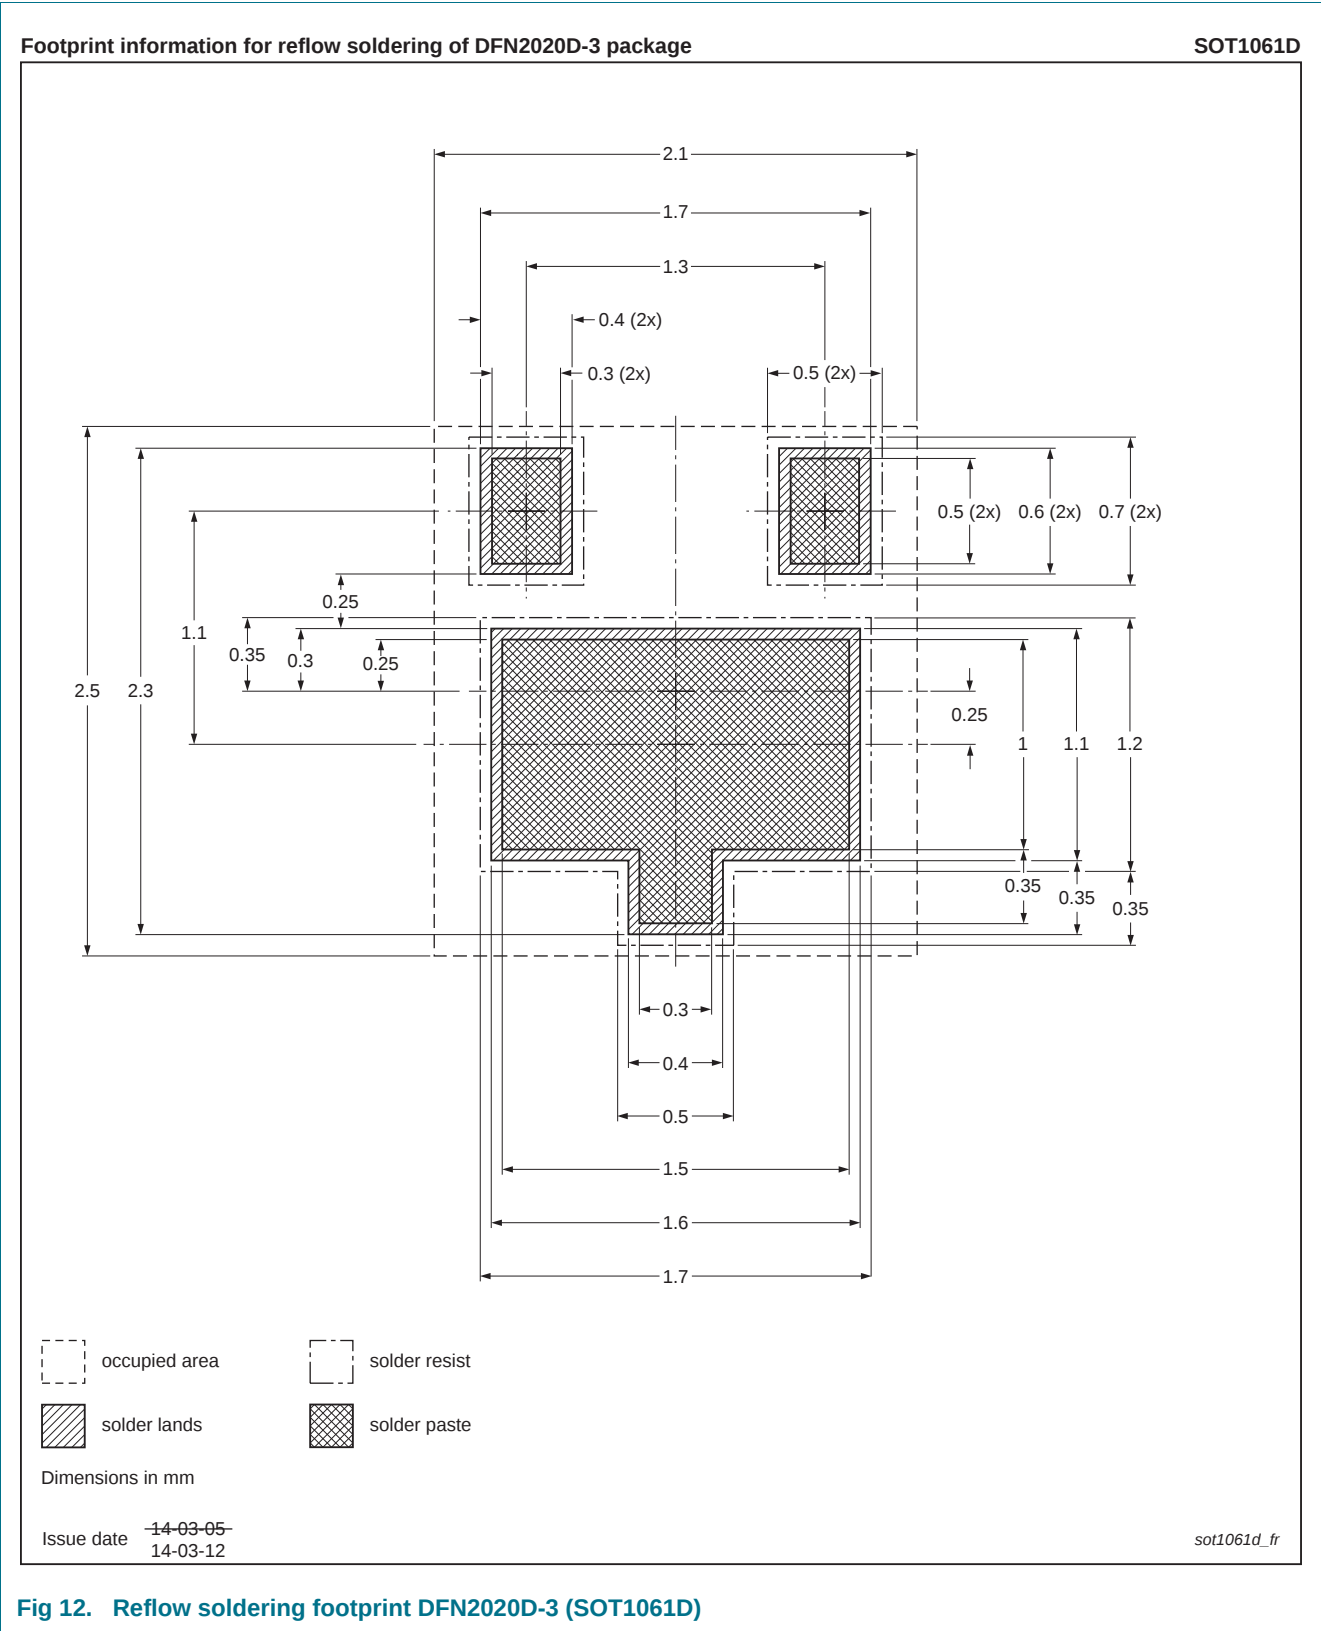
Reflow soldering footprint DFN2020D-3 (SOT1061D)
